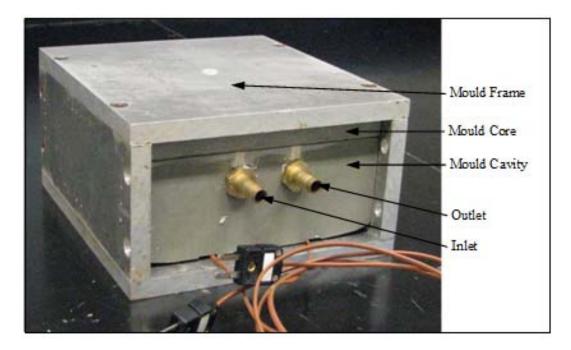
Complete Epoxy Mould Assembly with Aluminium Frame
